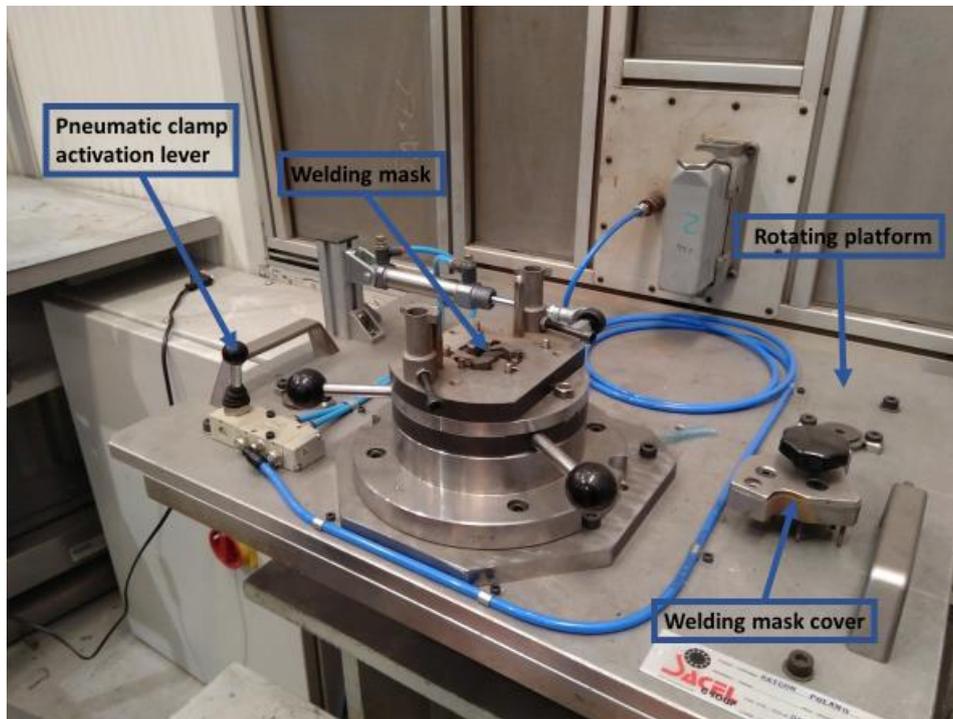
Stage 1 welding mask, final version, as mounted on the welding machine, with the main components highlighted [7]
